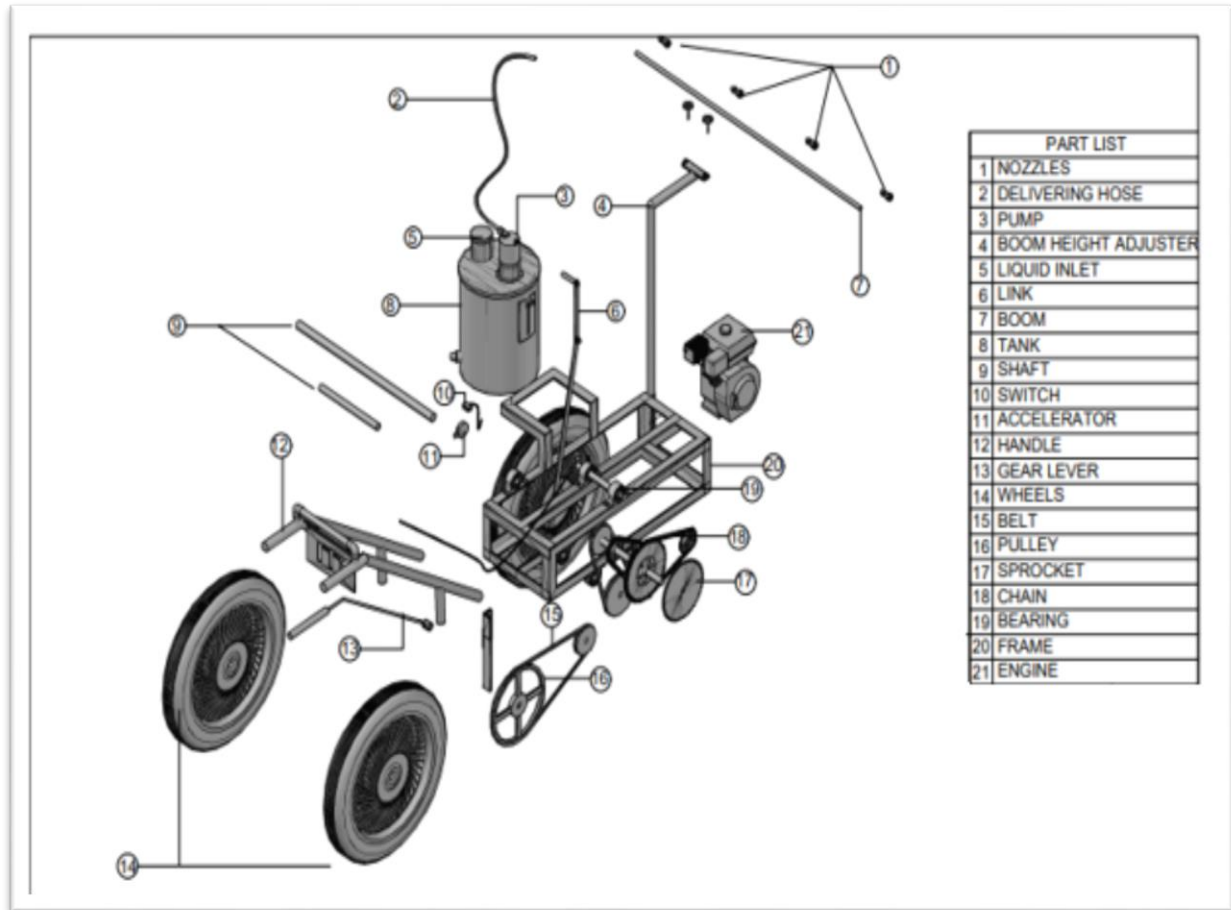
Exploded View of the Developed Multi-Nozzles Engine Powered Sprayer
